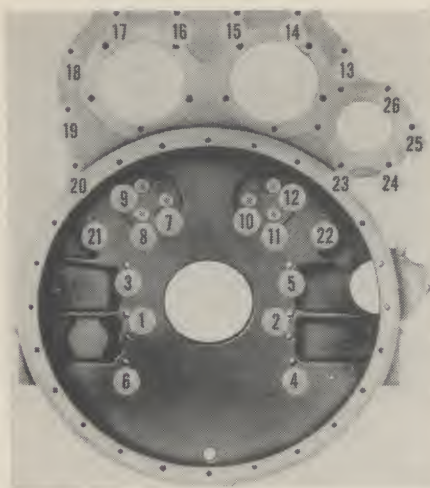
C—A GM engine flywheel housing showing bolt and cap screw tightening sequence.
